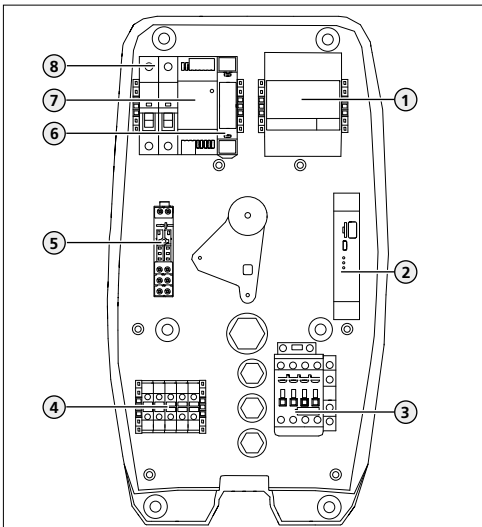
Inside view (example: version Professional+ E 7,4 / 22)
